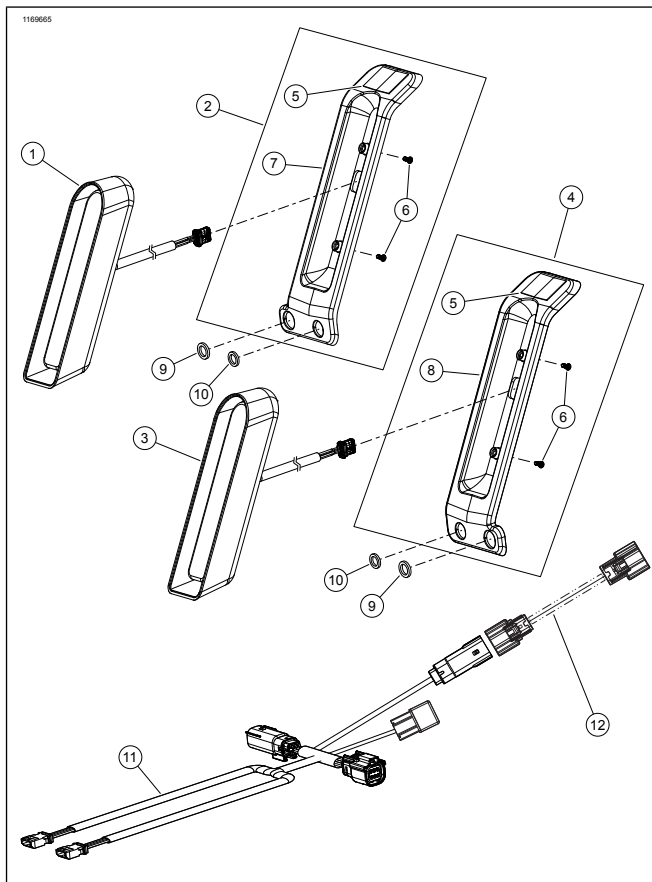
Service Parts: Run/Brake/Auxilliary Light Kit
